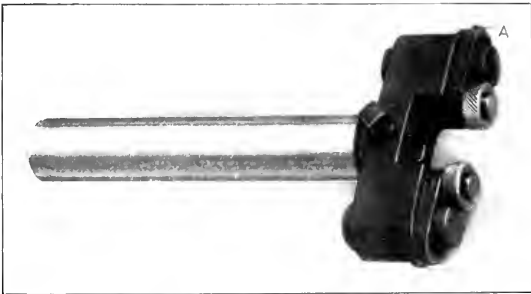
Adjustable Knurling Tool used in the Turret for Spiral or Diamond Knurling
